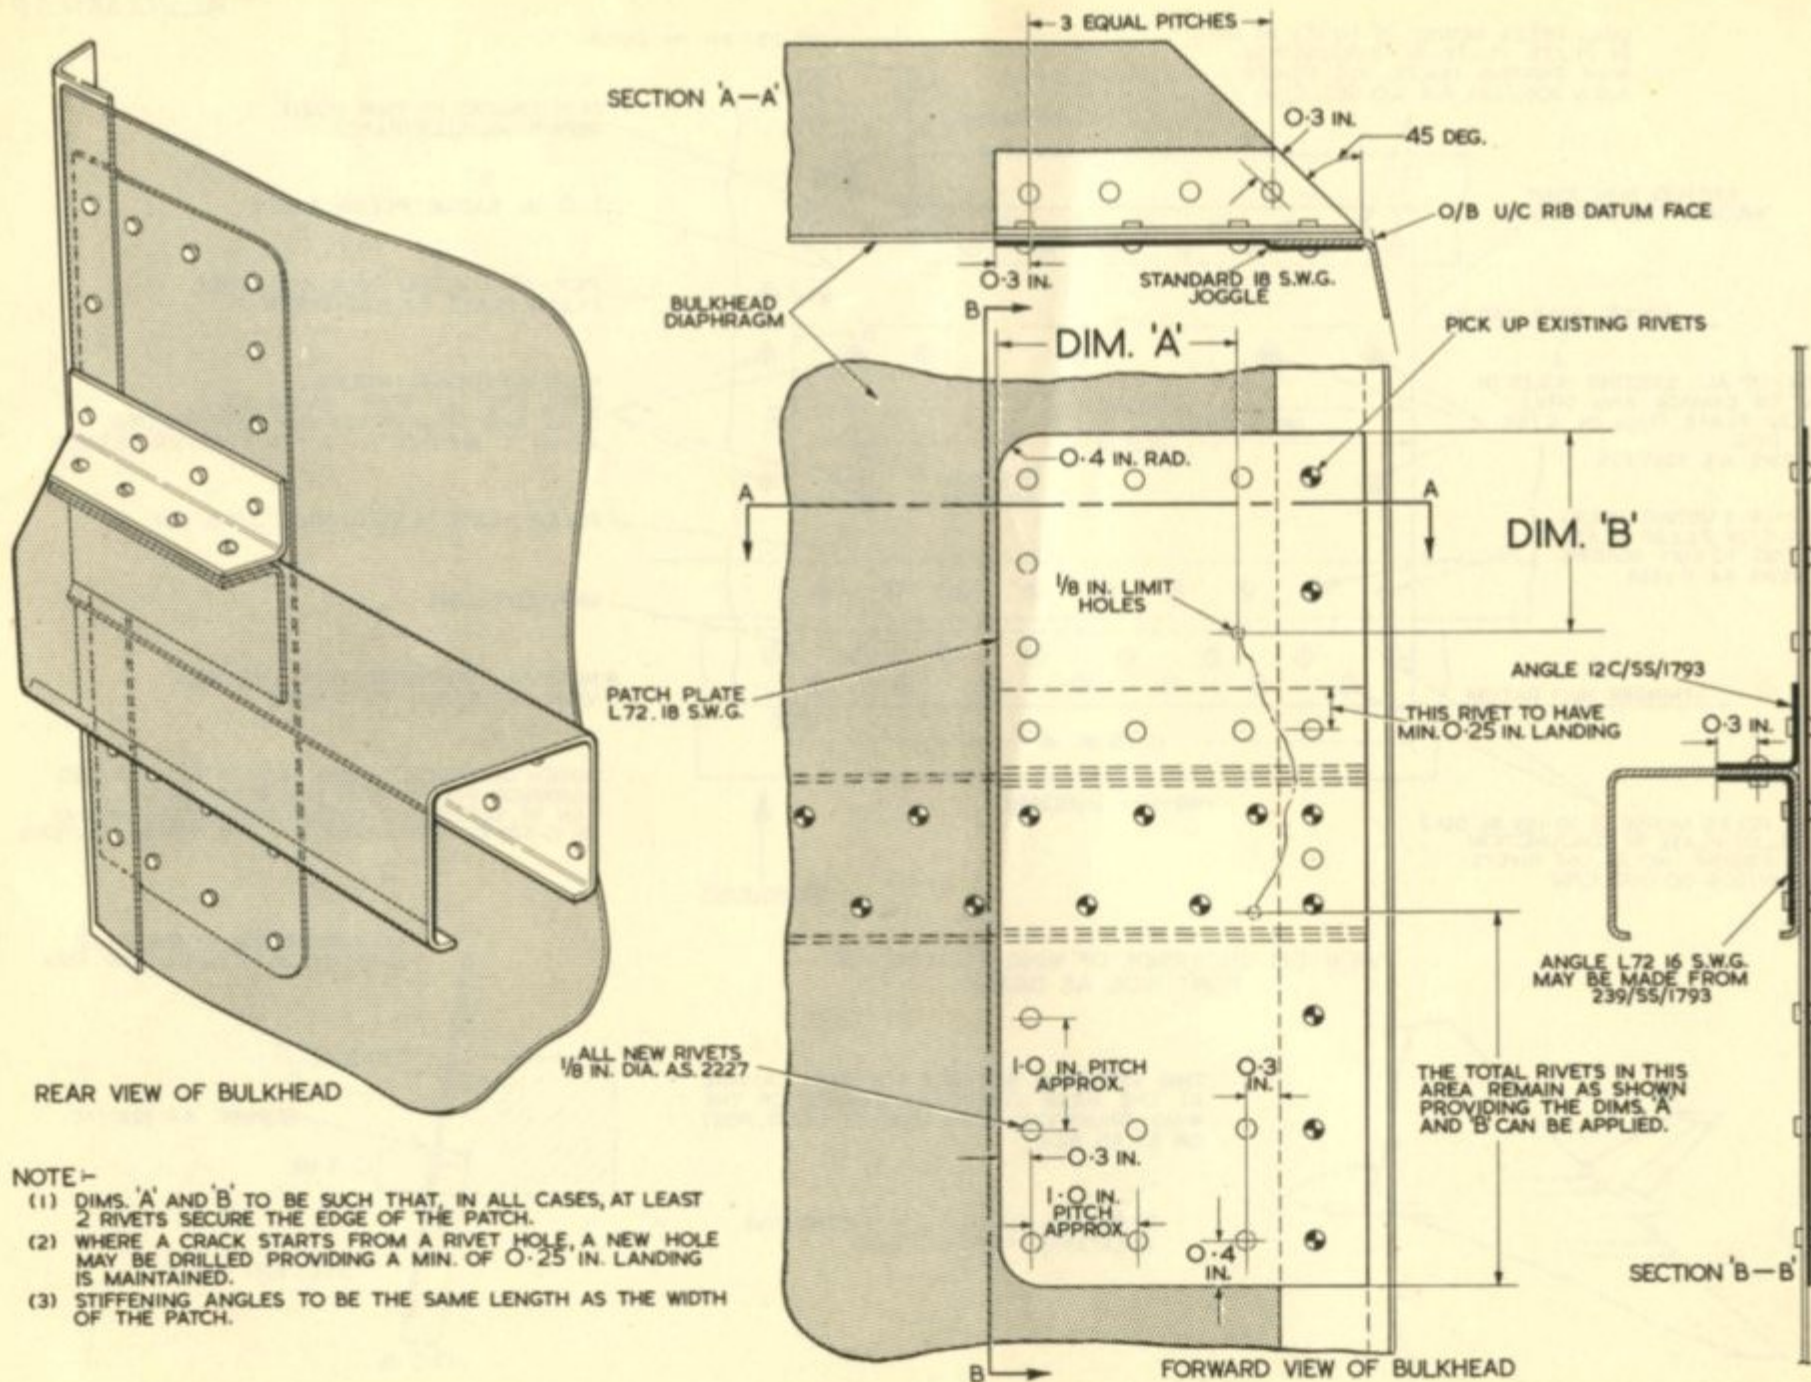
SKIN REPAIR TO WING L/EDGE BOTTOM SKIN
